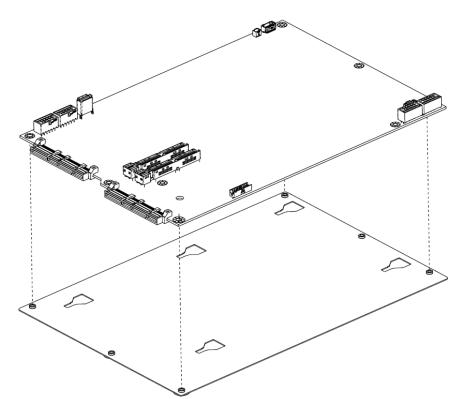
Example of Chassis-to-Board Bracket (Board Pan)
